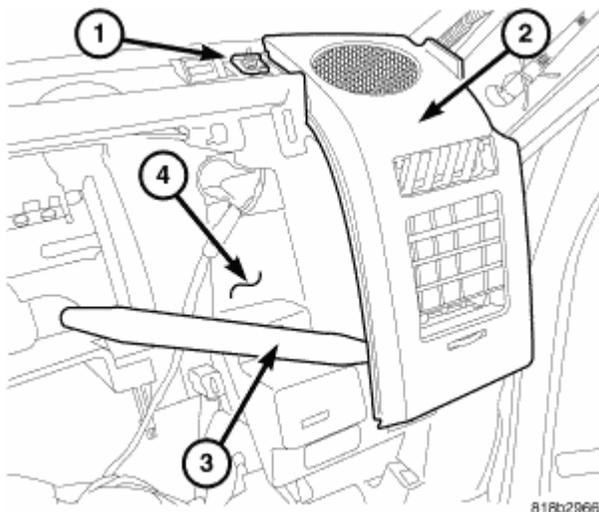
Screw, Air Outlet, Trim Stick C-4755 & Instrument Panel
